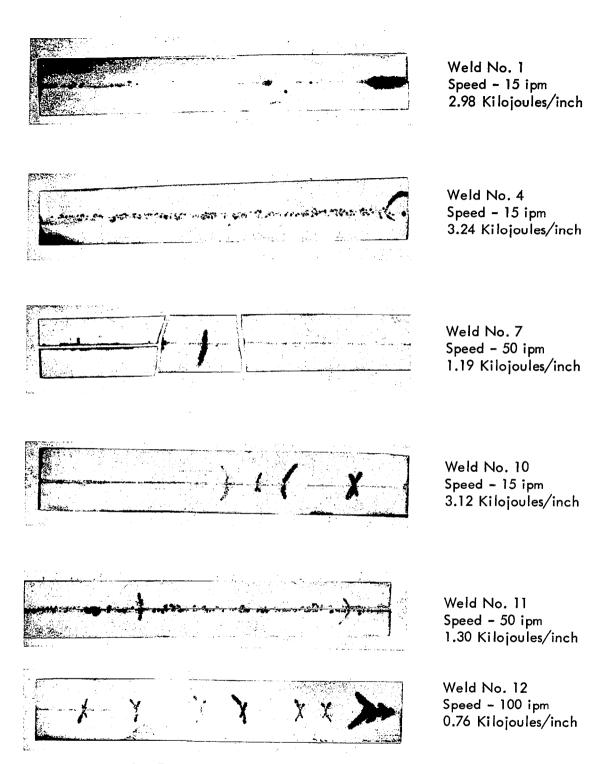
Typical Dye-Penetrant Results of Electron Beam Welds in Arc Cast Unalloyed Tungsten Sheet
